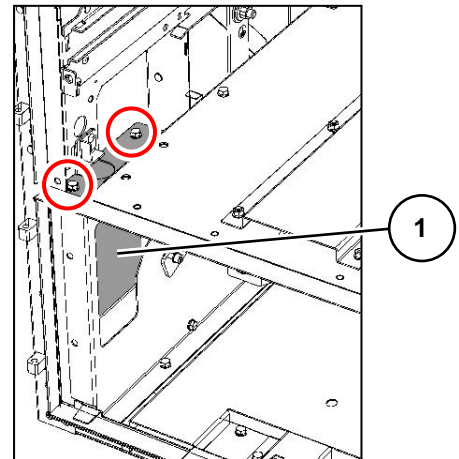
2 bolted joints on metal cover in switching-device compartment
